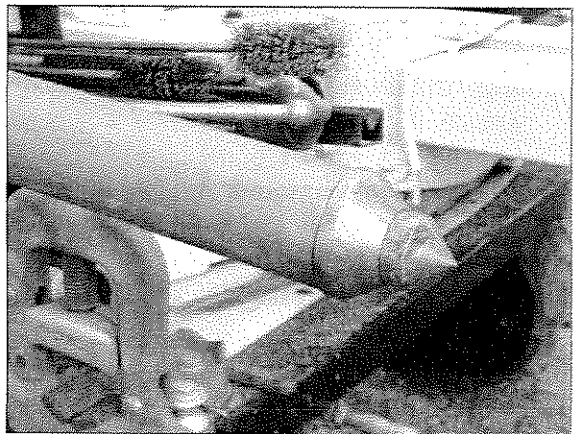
Thread the cutting shoe and point onto the sample tube.
